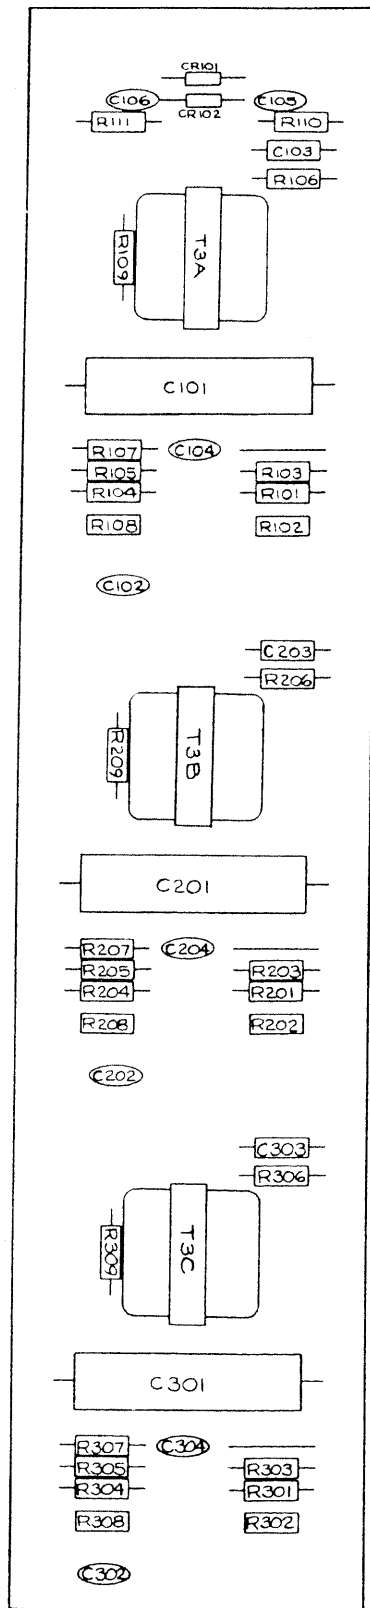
AMPLIFIER CIRCUIT BOARD ASSEMBLY, PARTS LAYOUT
